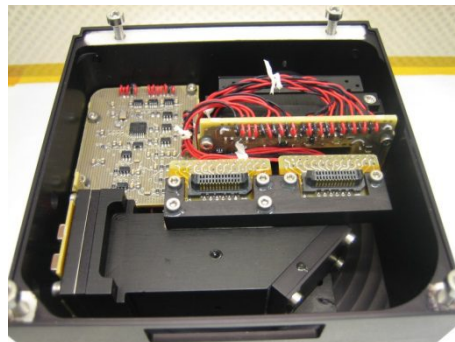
Integrated VISION-PFM without the cover plate and main control PCB.
